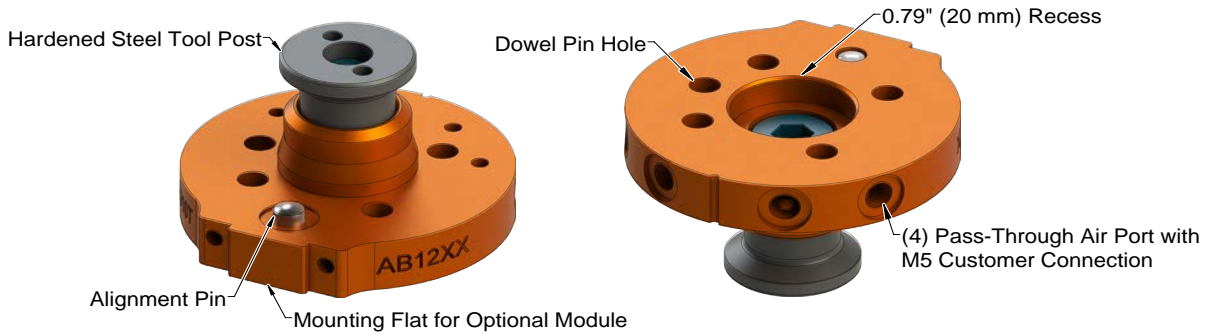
Master Plate Assembly (Shown Locked)
